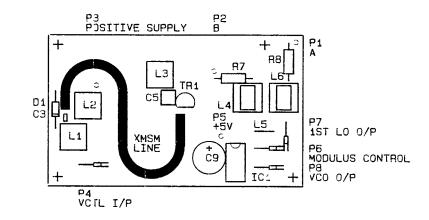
Oscillator Module: 1st L.O. VCO Board Side A Layout
